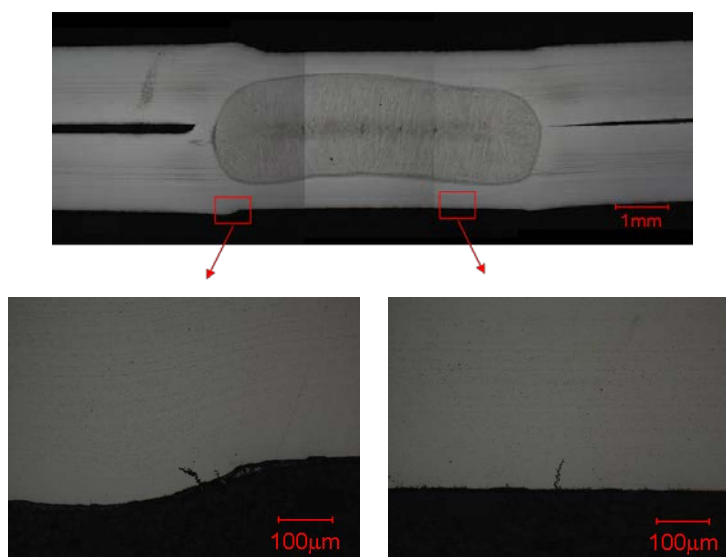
Cross section observations of spot weld with 3mm gaps under sheets
